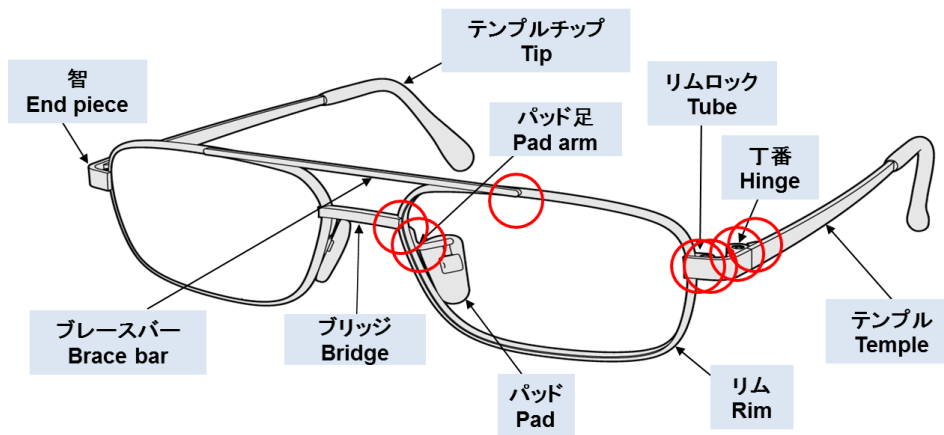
Names for respective parts and welded parts of eyeglasses.
